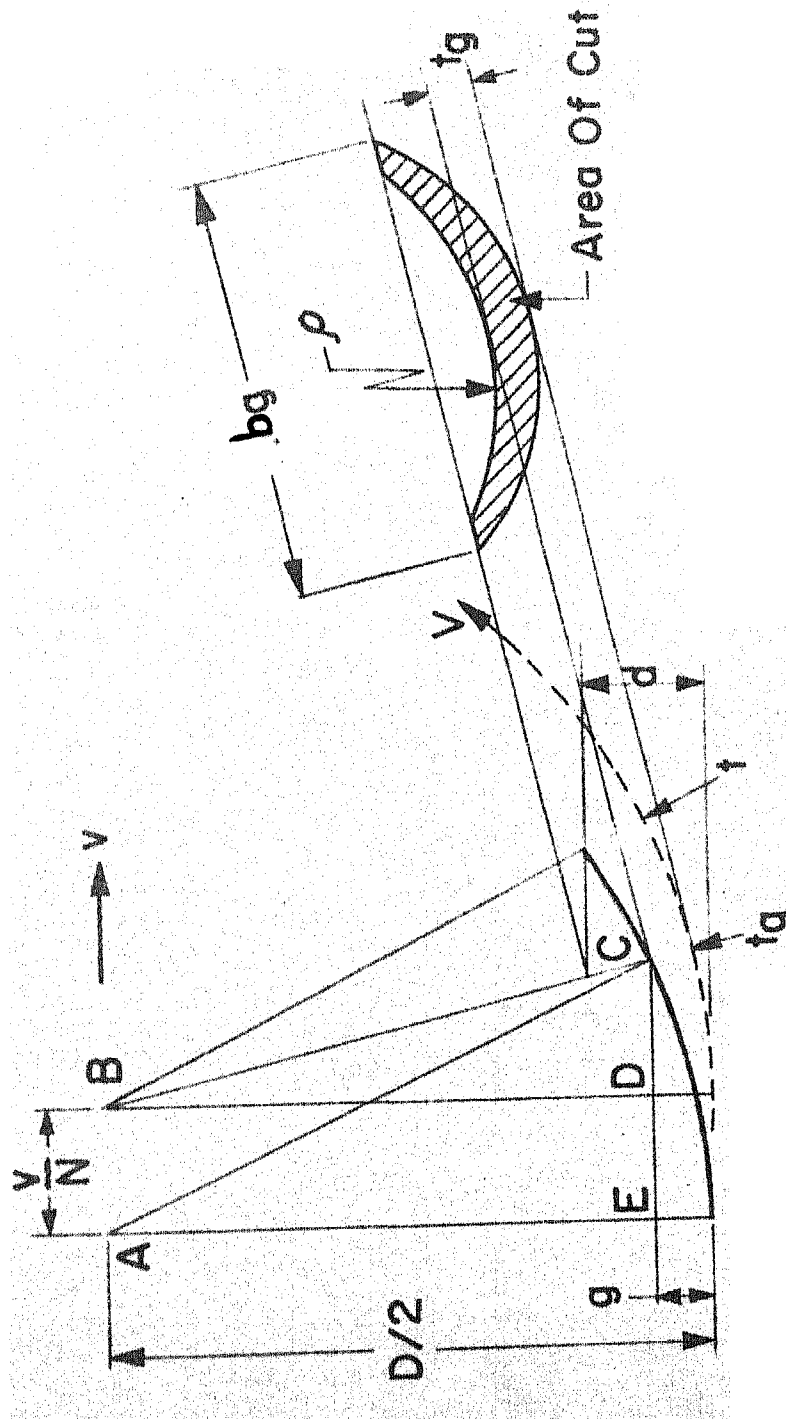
Geometry Of Chip Formation And Chip Area Of Cut For Spherical Tools
